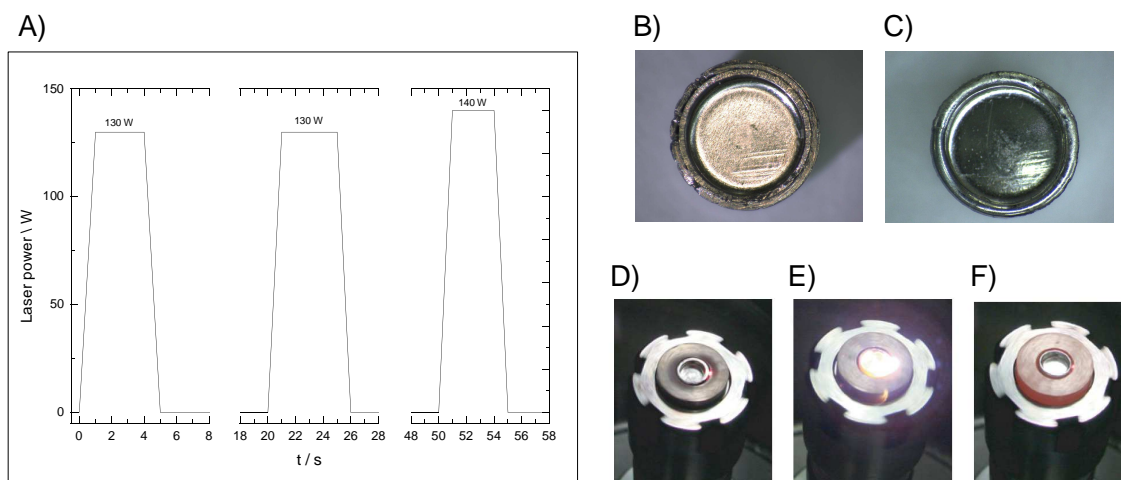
A: Example of the welding laser power-time program. In this example 3 welding steps are used with 130 W and 140 W.
